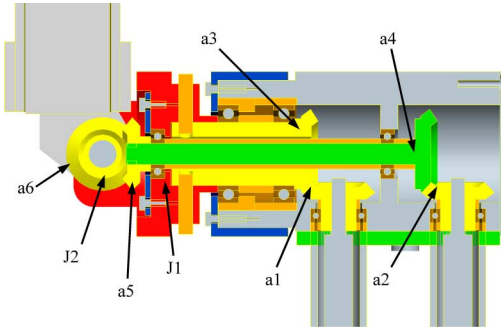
Computer-aided design drawing of the shoulder mechanism.
